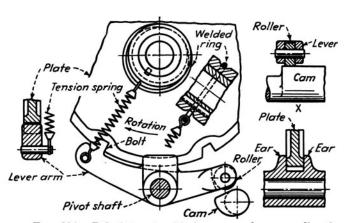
Bolt integral with lever arm has ears directly above the pivot shaft fitting on either side of the plate. As the plate reciprocates, it pulls the bolt along with it. Cam contacts roller, the cam being long enough at X to accommodate the required travel of plate and bolt. The welded ring fits in groove in hub of plate and is connected to tension spring, the other end of which engages a pin in lever.
